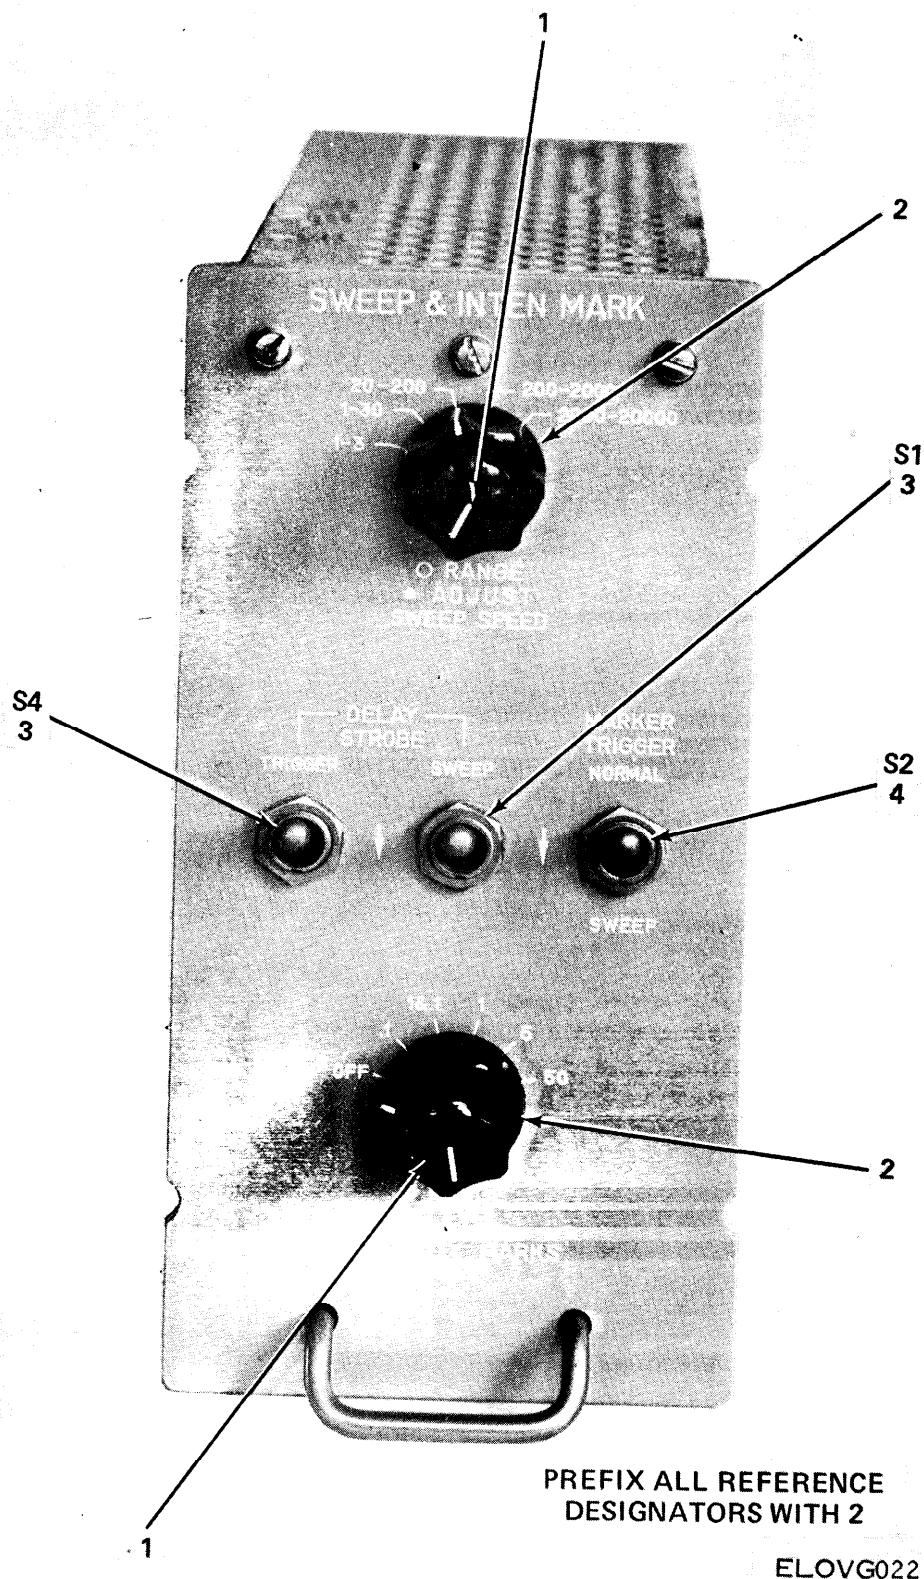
① Panel assembly, unit 2 (sheet 1 of 2).
